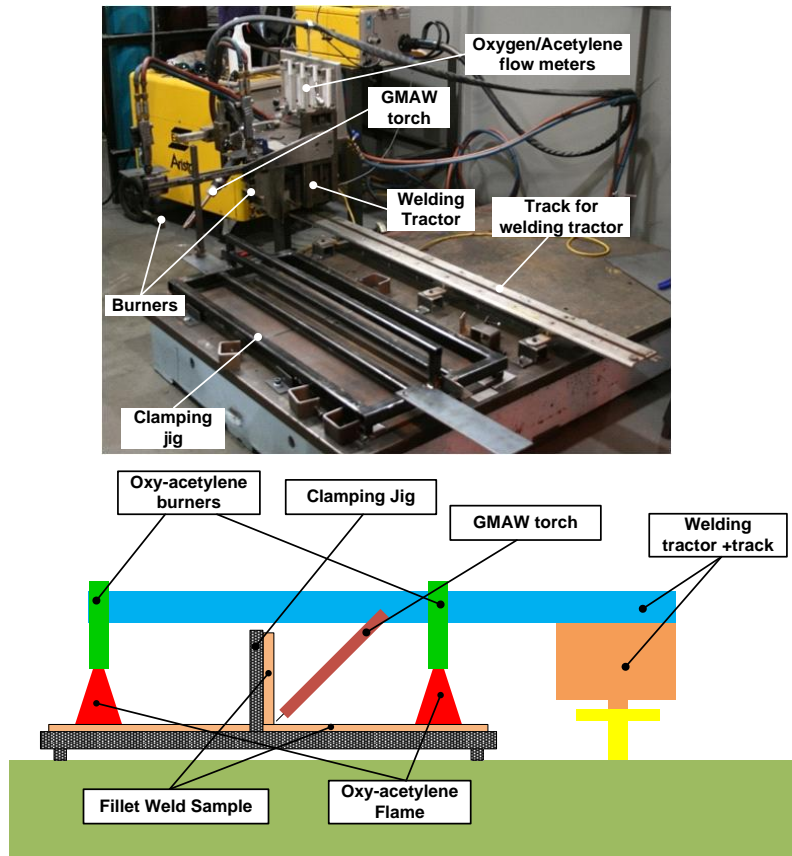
Thermal tensioning by heating fillet weld experimental setup
